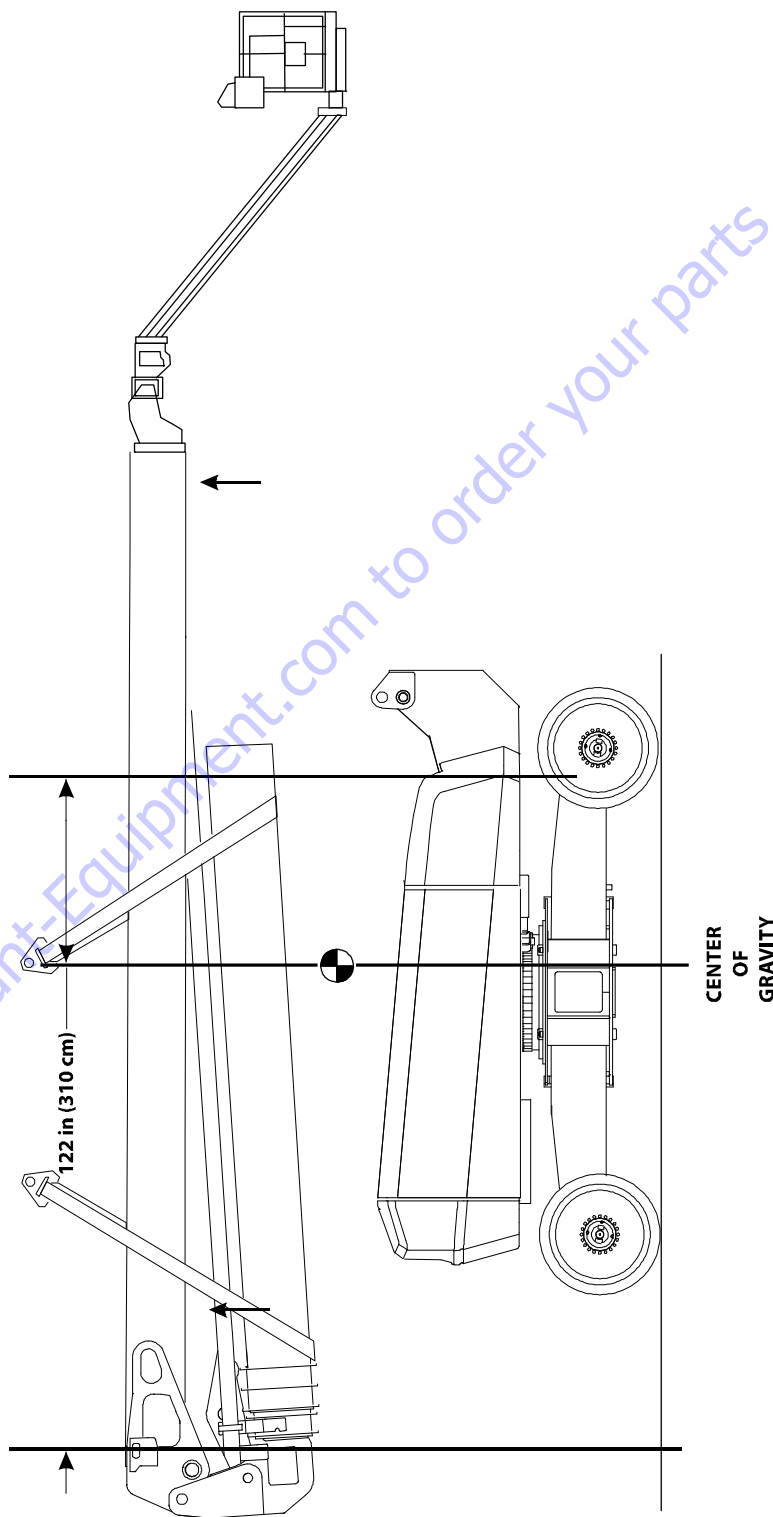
Swing Bearing Removal - Sheet 2 of 4
